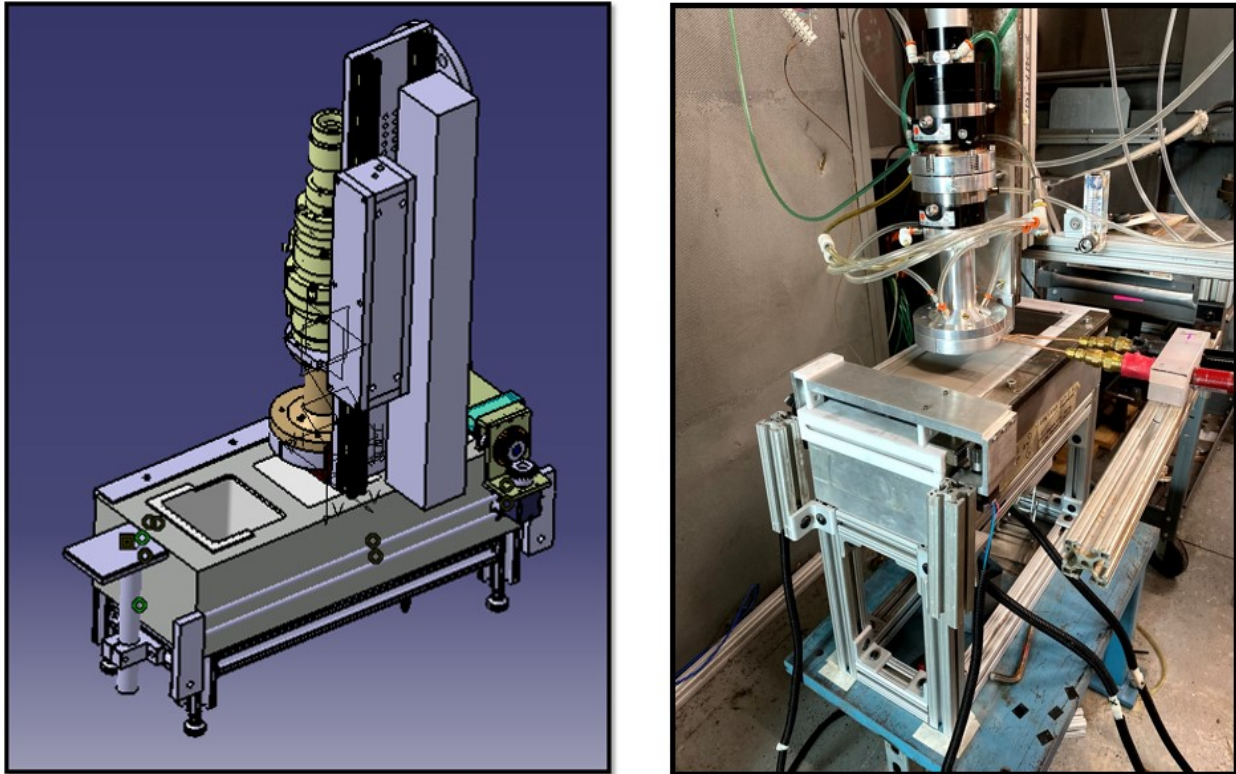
CAD ISLM assembly (left) and physical ISLM assembly (right)
